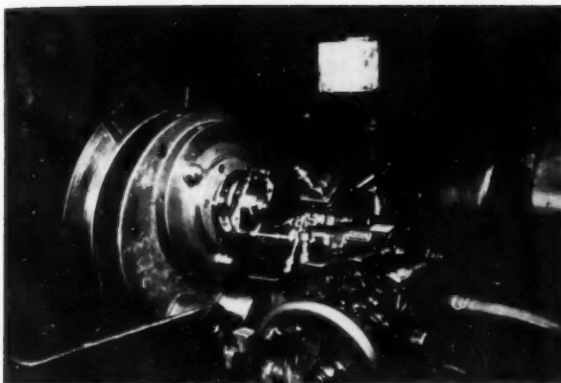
Heald gap grinder grinding inside diameter of pinion shaft holes in pinion cage for reduction gear unit.
